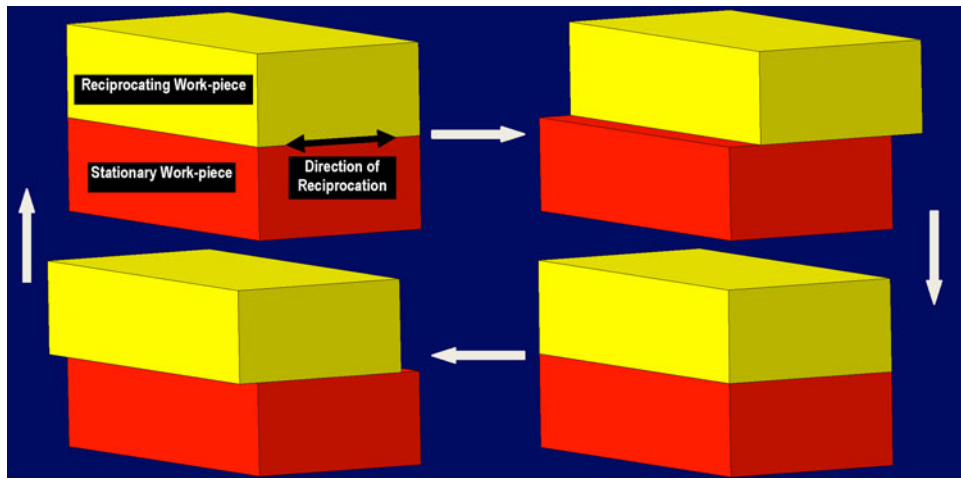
A schematic of the Linear Friction Welding (LFW) process
